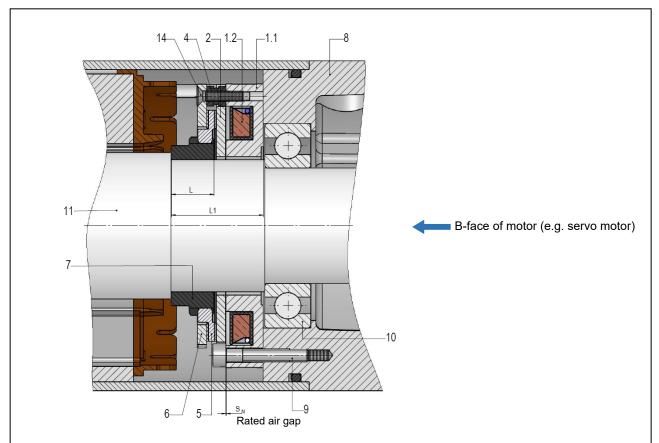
/1: Flange mounting of spring-applied single-disc brake SL 500..A00 (example) to the motor (e.g. servo motor); contact of hub (7) with stop shoulder of motor shaft (11); assembly of hub (7) and motor shaft (11) by interference fit (see Section 4.1.2)
